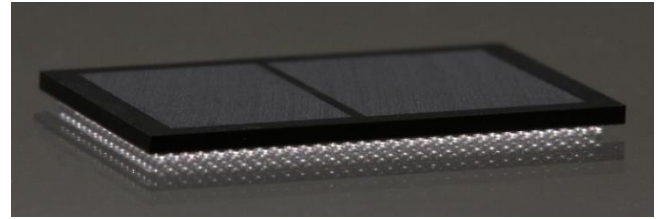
Demonstrator module after balling and separation ready for PCB assembly
